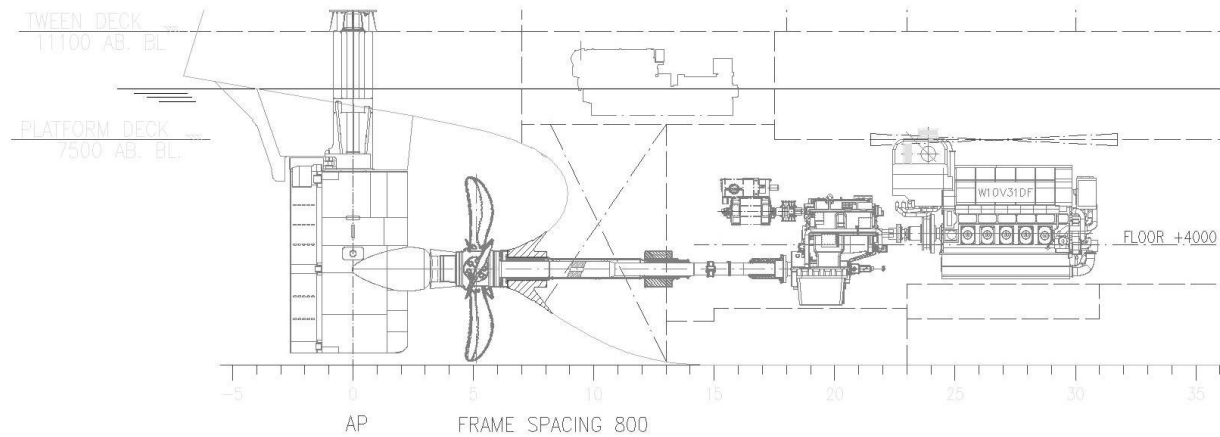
The propulsion layout of concept 1. From right, Wärtsilä main engine (four-stroke), gearbox, shaft generator, shaft, propeller. The auxiliary engine is seen above the propulsion line.
